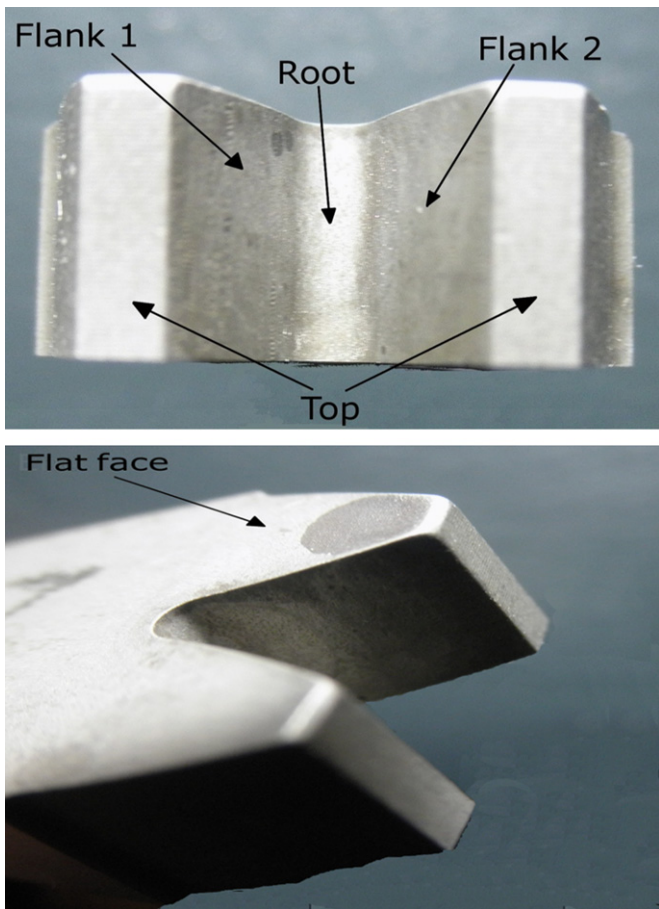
Topography of gear-tooth samples, indicating the various measurement sites. (a) Top-down view of recessed V-groove; (b) sideways view of flat surface.
